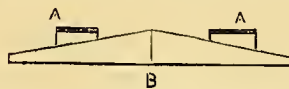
STEADYING WEDGES USED IN CUTTING BELLY.
